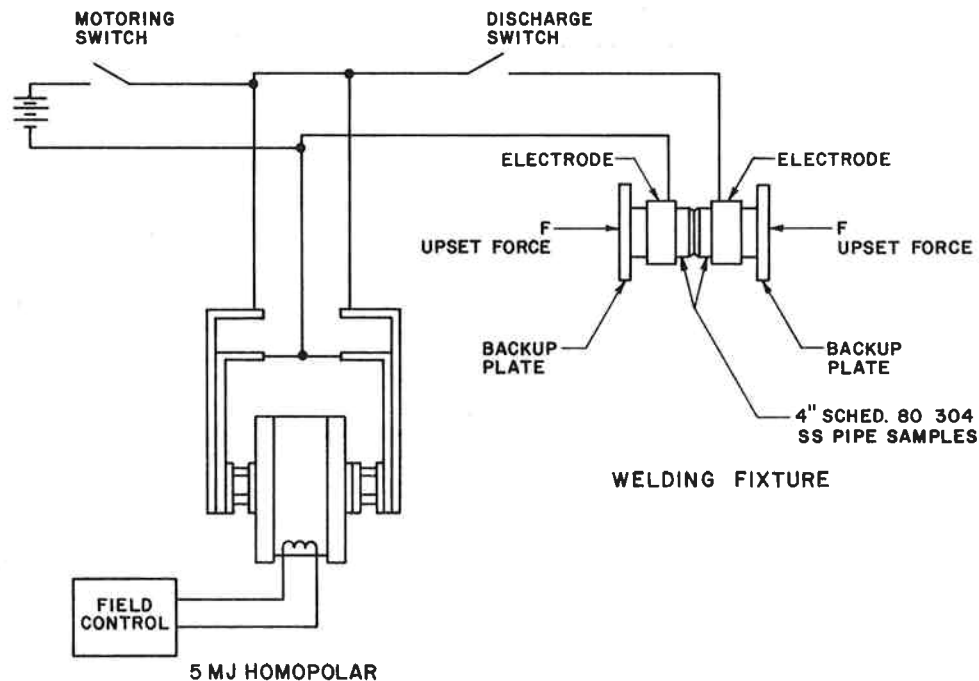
Schematic of Welding Fixture - 5 MJ Interface
